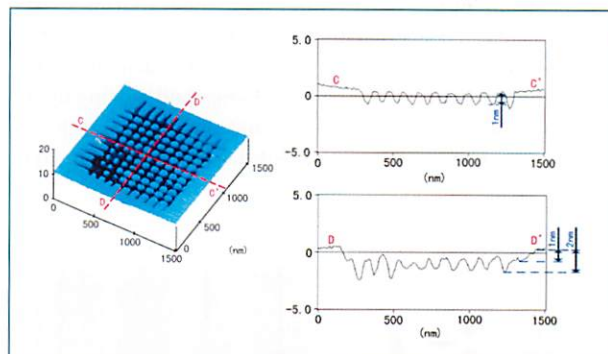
Machining Example of Lattice Groove with c-BN tip
